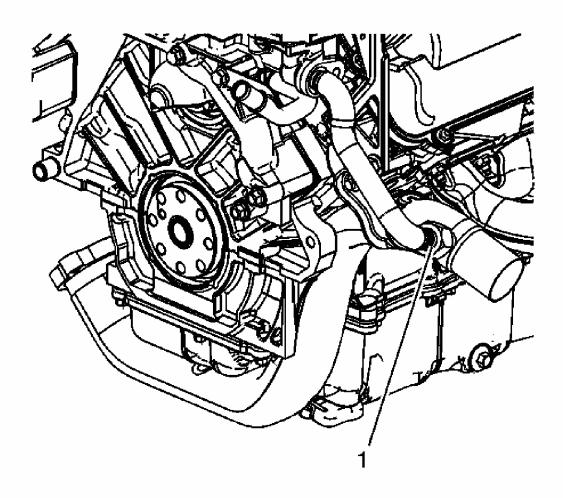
Identifying EGR Valve Inlet Pipe Nut Courtesy of GENERAL MOTORS CORP.
